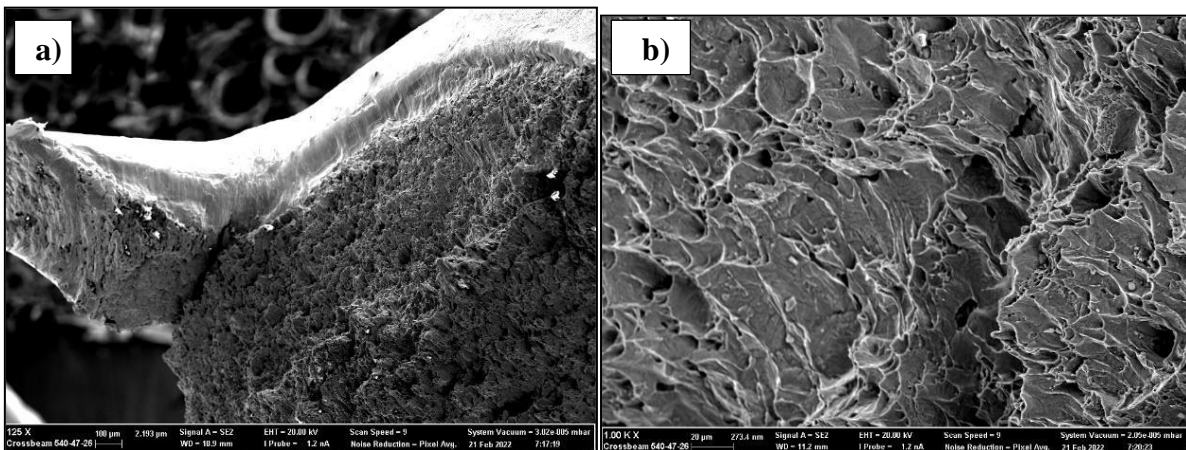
a) Fracture surface morphology (85-125X, 20kV, SE, FEGSEM). b) Fracture surface morphology (1000-1500X, 20kV, SE, FEGSEM) (Source: UP Microscopy Laboratory)
